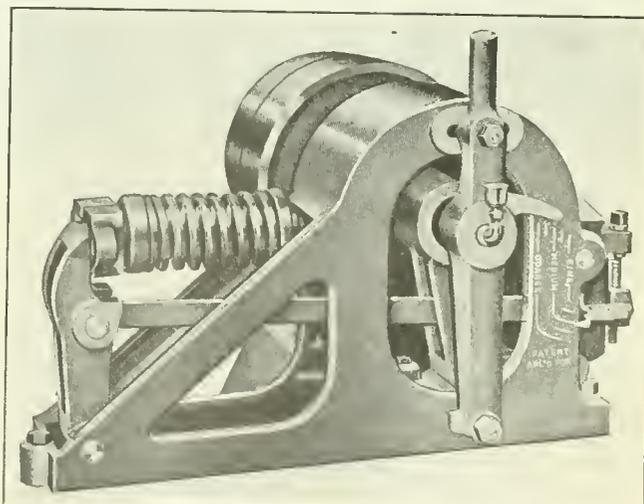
HEAD MOTION OF DIAGONAL-PLANE TABLE
